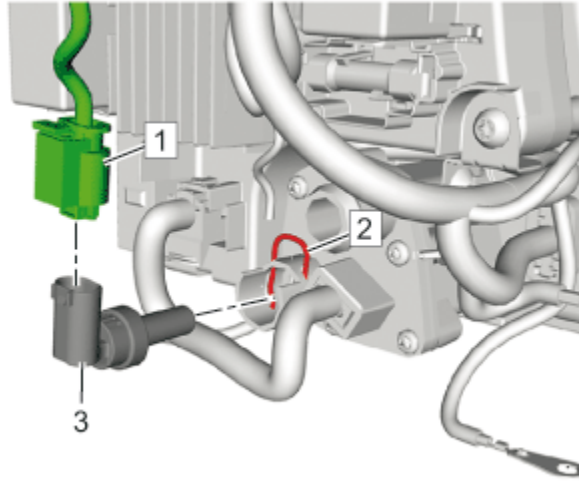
Electrical Connector And Engine Coolant Temperature Sensor
